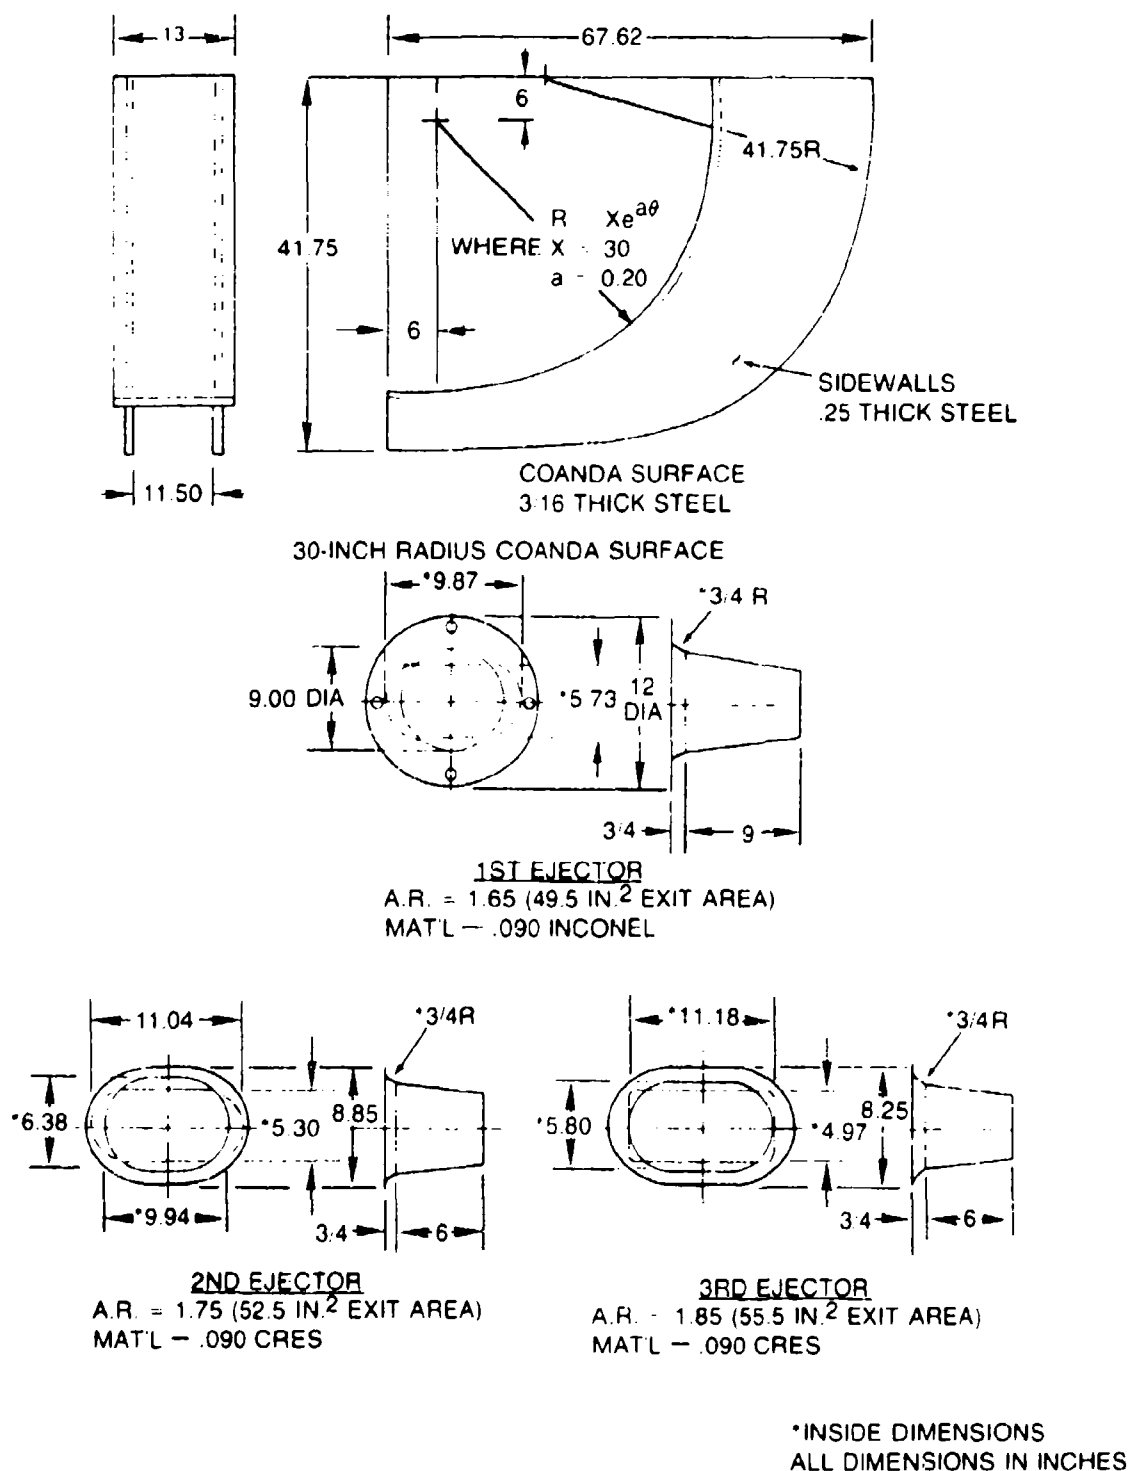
Dimensional drawings of single engine Coanda surface and ejectors.
